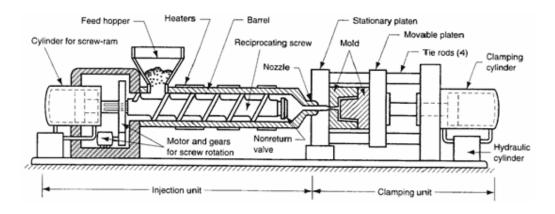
The various parts of a typical injection moulding machine (Plastics Wiki 2010b)
